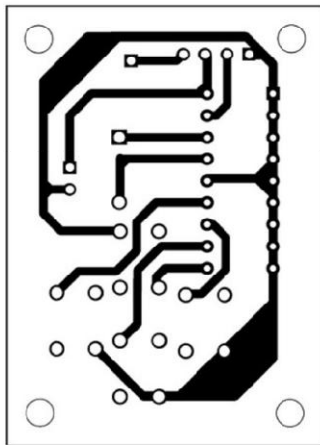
An actual-size, single-side PCB for the RF transmitter
